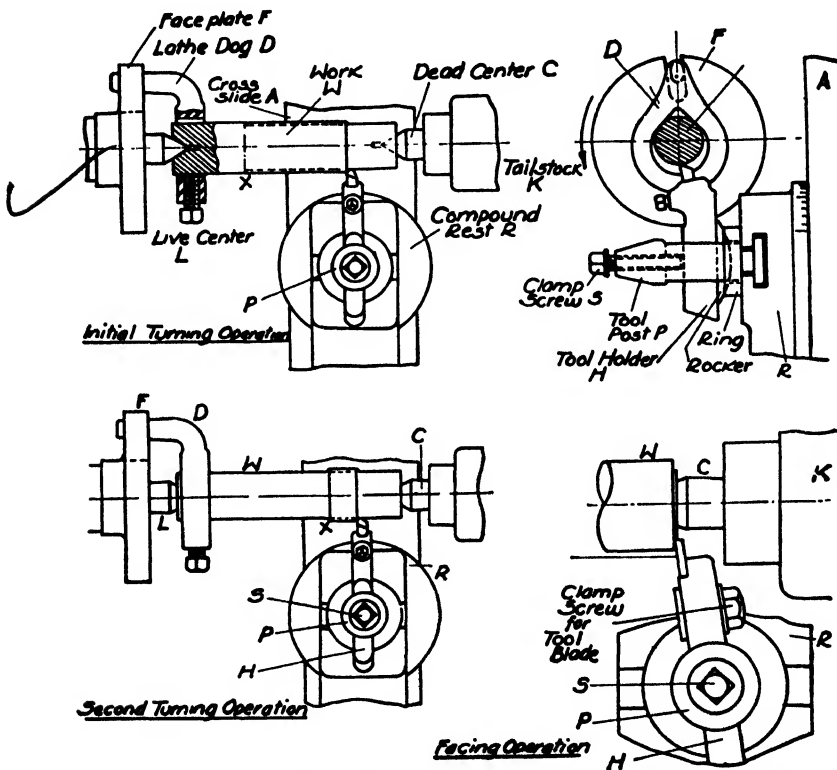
Turning and Facing Cylindrical Work in an Engine Lathe.
